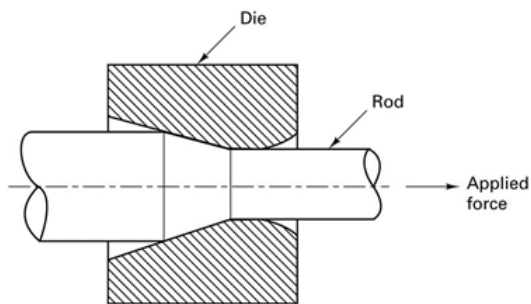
Schematic drawing of the rod-or bar-drawing process.
